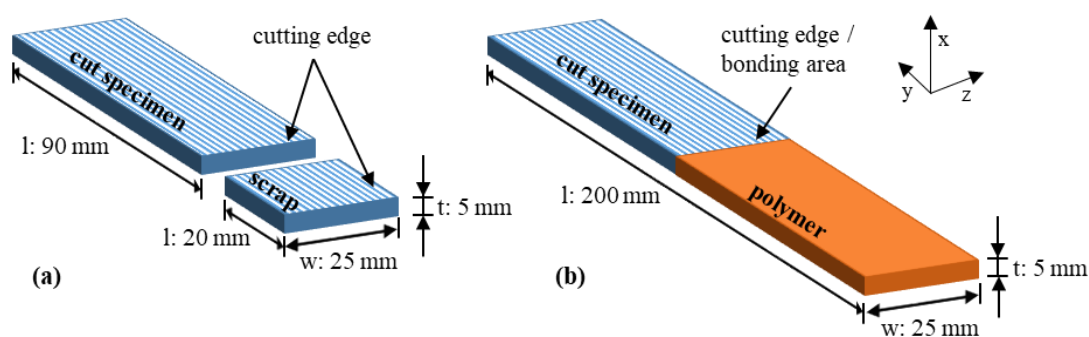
Shear cutting (a) and injection moulding (b) specimen
